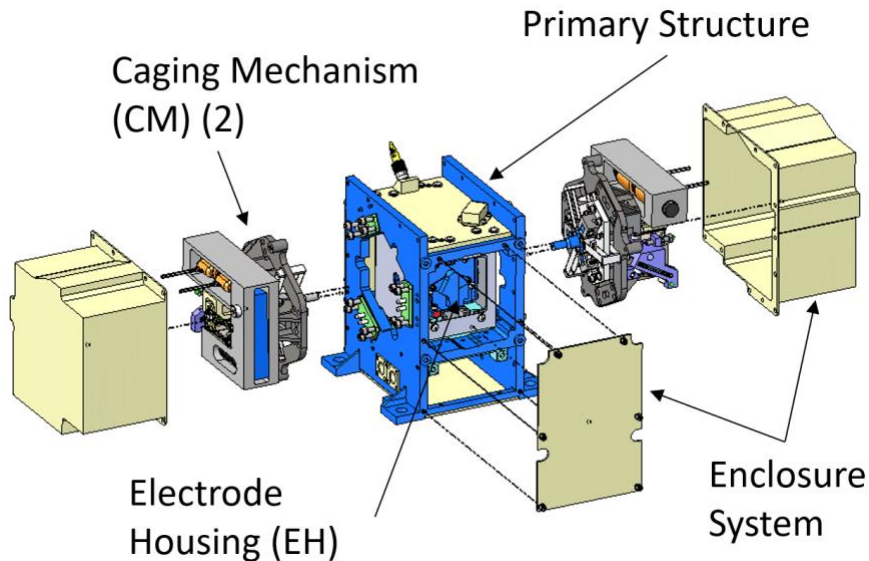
S-GRS Sensor Head containing the test mass, electrode housing, Caging and Release Mechanism, and Enclosure
